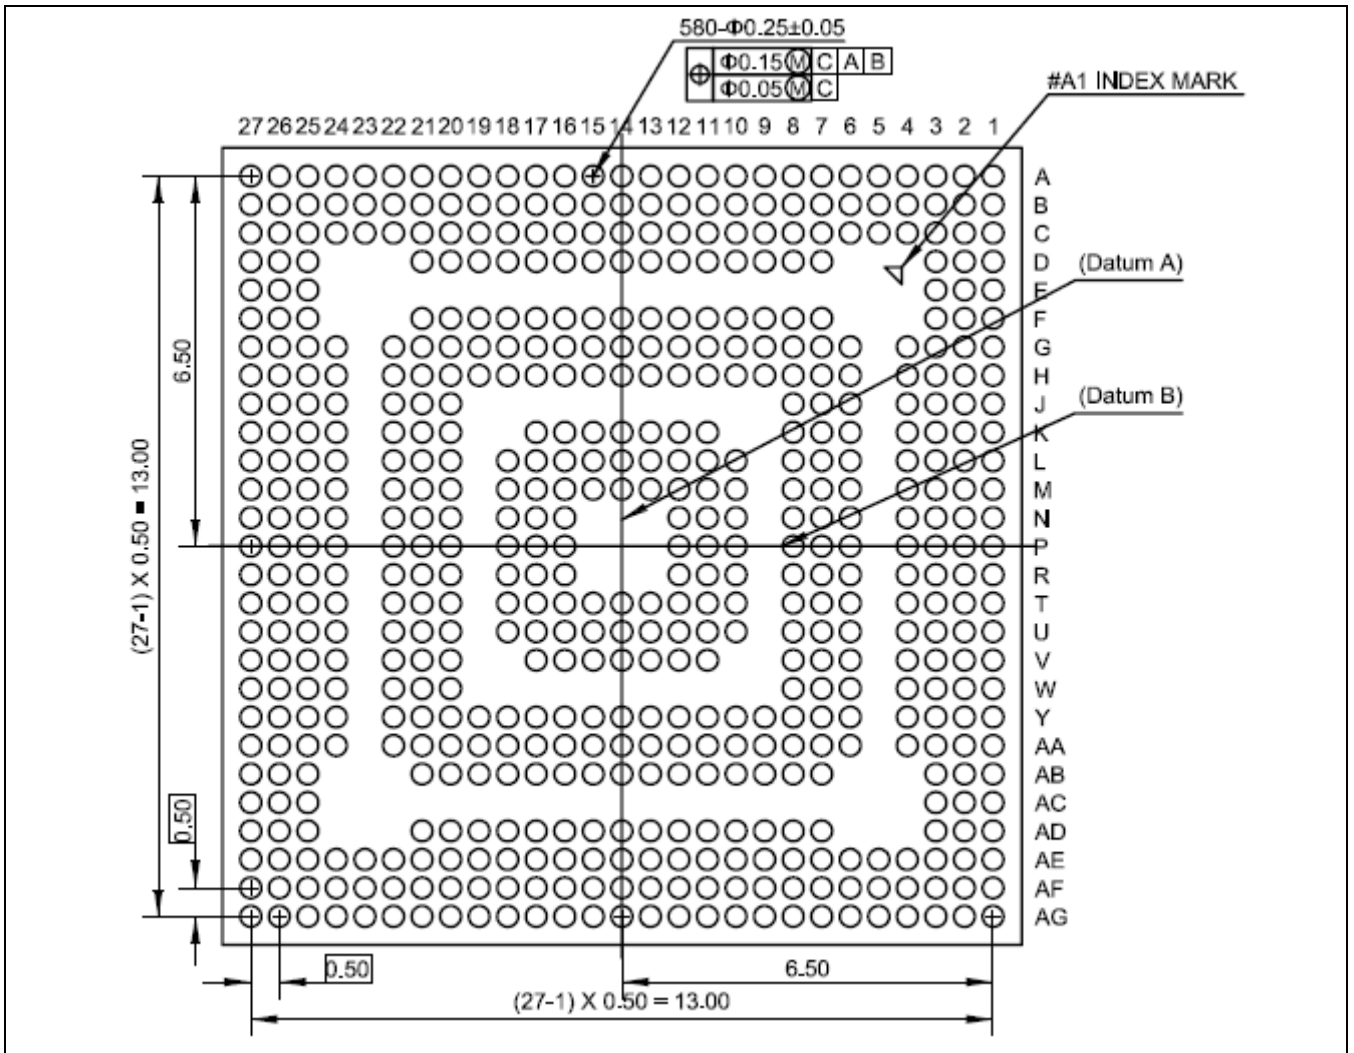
1 S5PC100 Pin Assignment (580-FCFBGA) Bottom View
